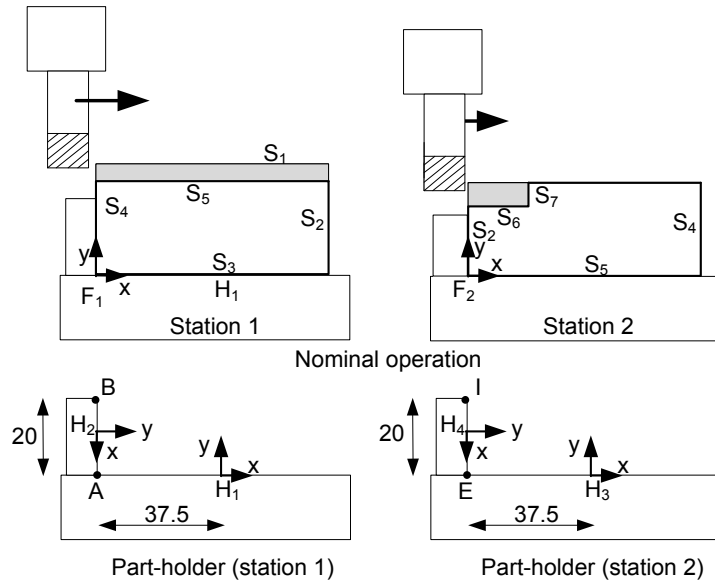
MoMP example. Multi-station machining process to manufacture the 2D example. Dimensions in *mm*.
